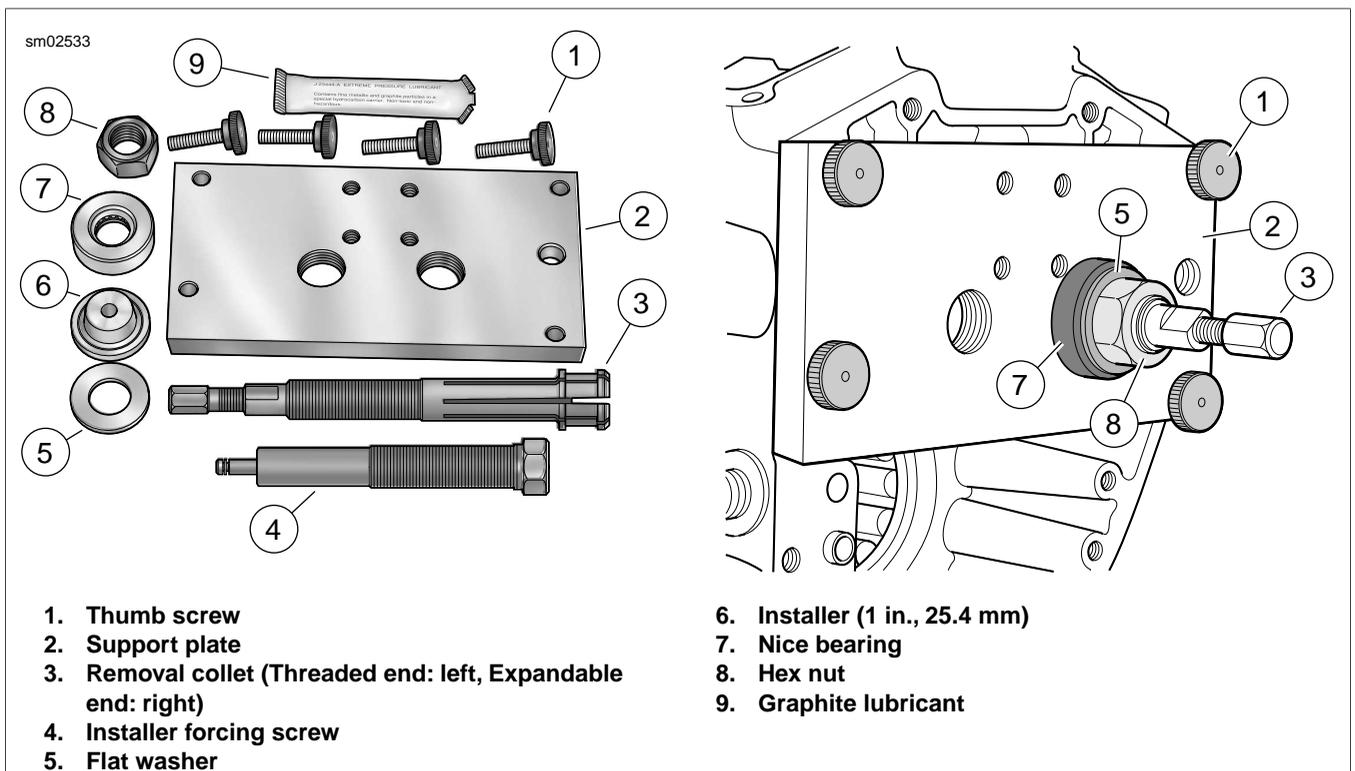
Camshaft Needle Bearing Remover/Installer (Part No. HD-42325-A)
